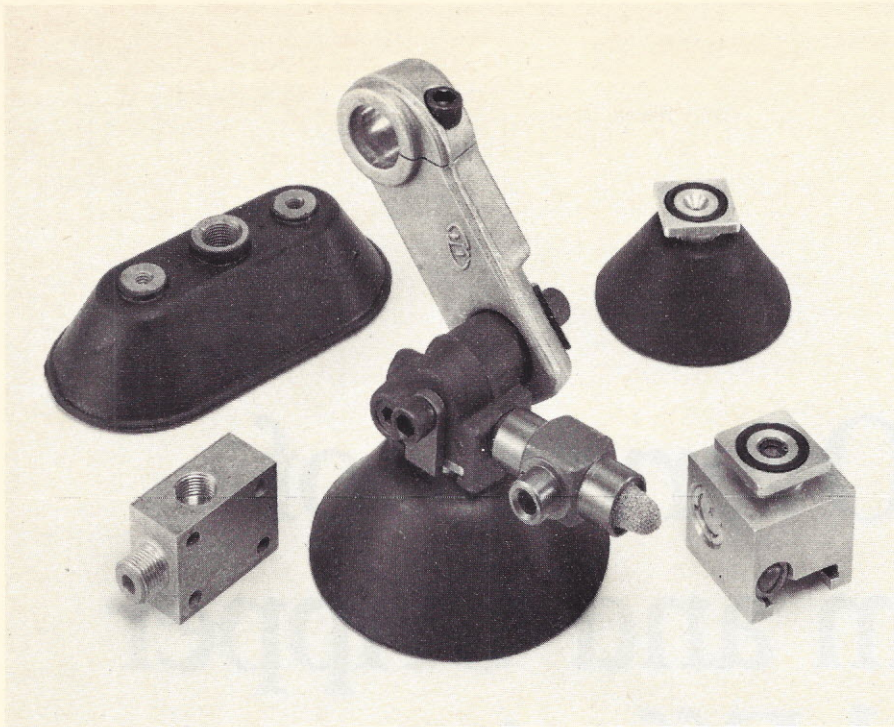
The Vaclok™ vacuum gripper assembly consists of the venturi (left front), the vacuum actuating valve (right front), and a vacuum cup. Cups can be oval (left rear) or round (right rear). The completed assembly is shown center on its mounting bracket.
